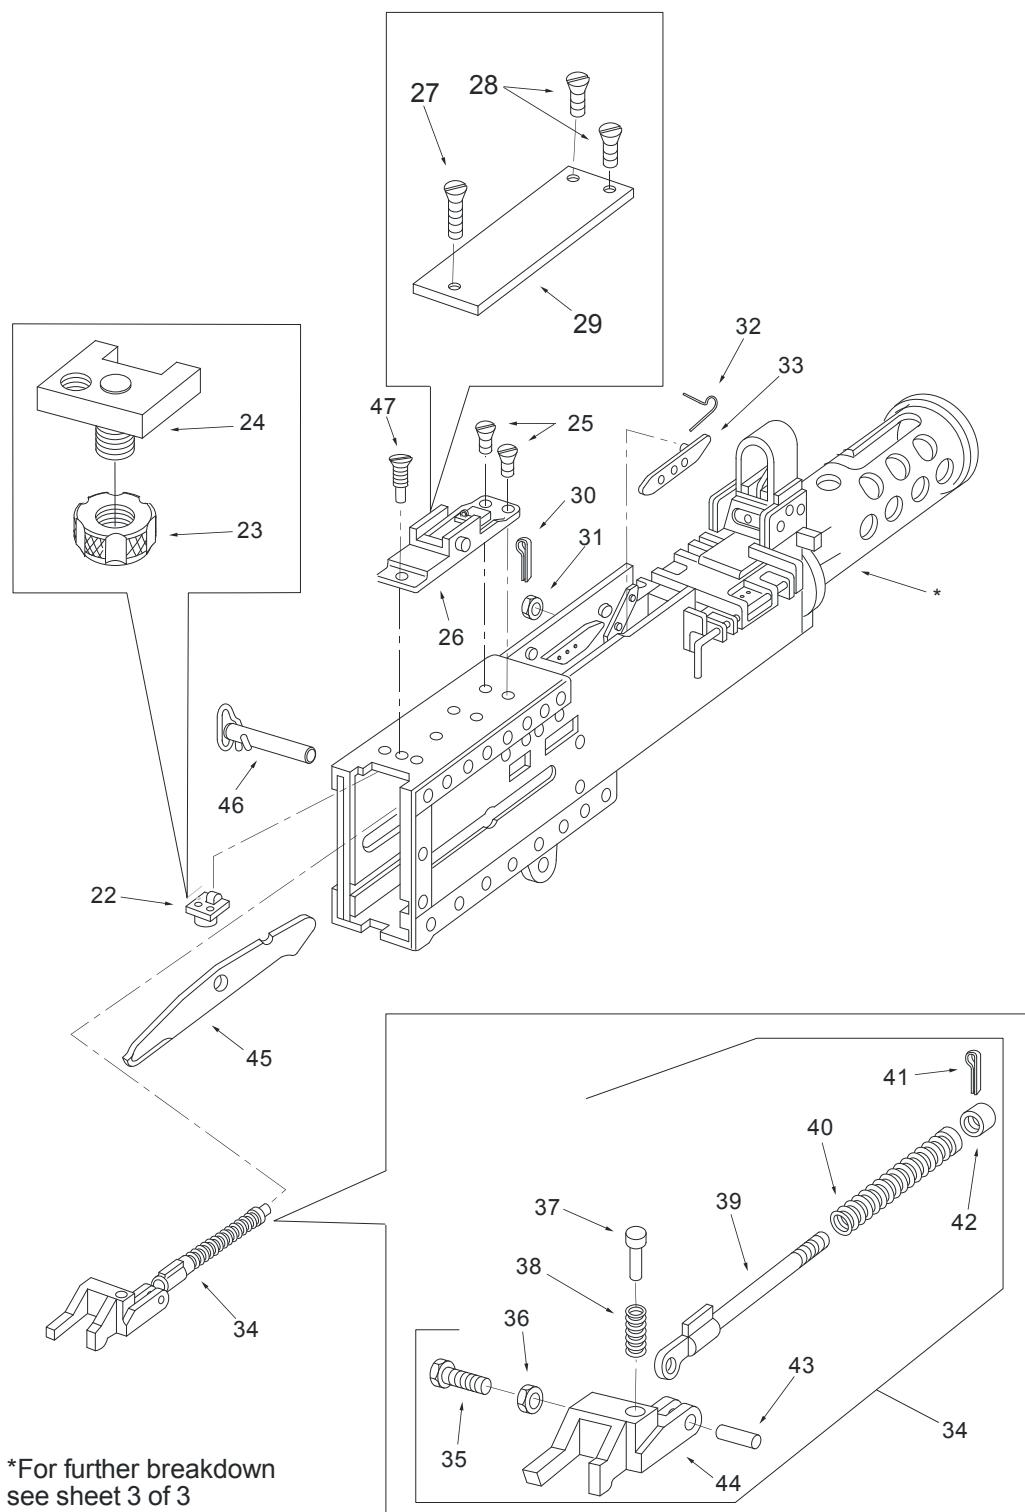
M2A1 Machine Gun 13006168; Flash Suppressor 7162072 and 3453; Adjustable Trigger Lever Stop Assembly 7265212; Bolt Latch Assembly 8448125; and Rear Right Hand Cartridge Stop Assembly 5577409. M2A1 Fixed Trigger Assembly, Timing Nut 3440, and Timing Screw 3439 (Sheet 1 of 3).
